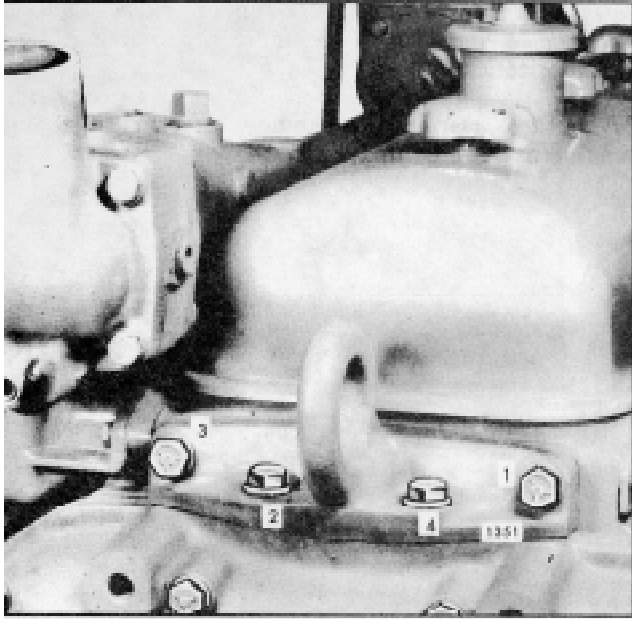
Lifter Bracket Bolt Tightening Sequence
